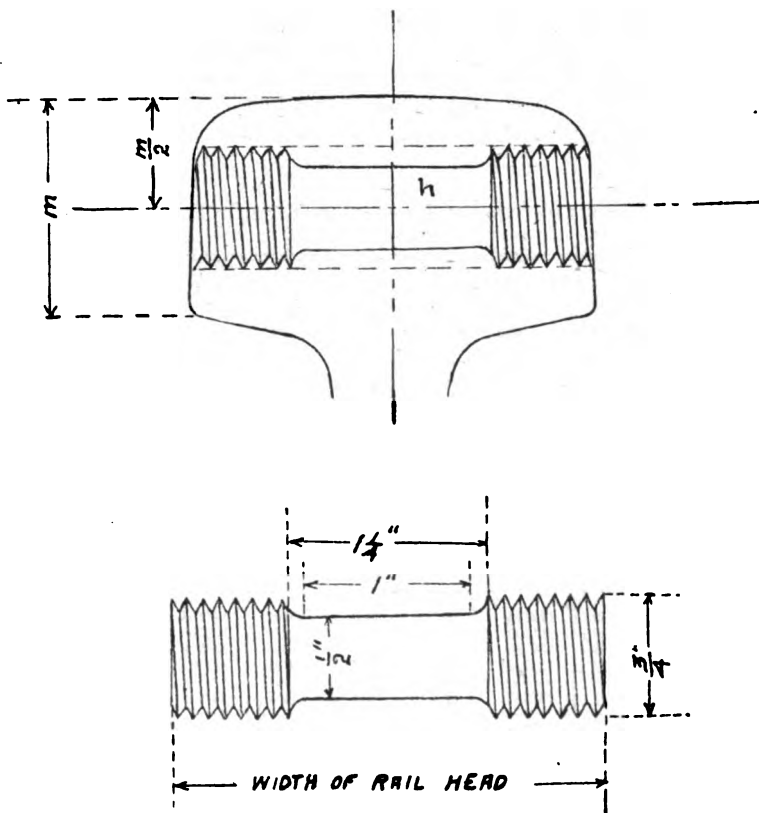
SPECIMEN FOR TRANSVERSE TENSILE TEST OF HEAD.
